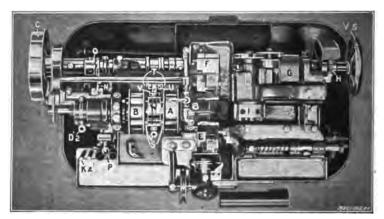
Fig. S. Plan View of No. 00 Brown & Sharpe Automatic Screw Machine
